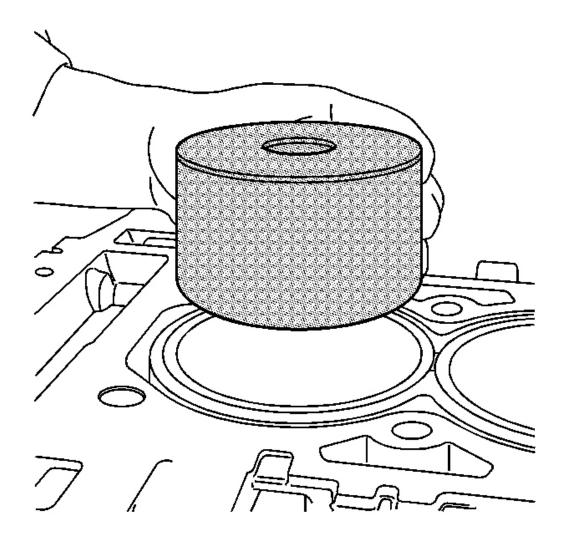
Placing Metal Shaving Catch Plug Into Cylinder Bore Sleeve Courtesy of GENERAL MOTORS CORP.
